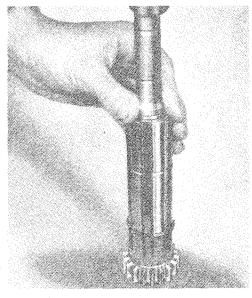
Fitting Needle Roller Retainer Rings with Churchill Tool No. 20SM68.
